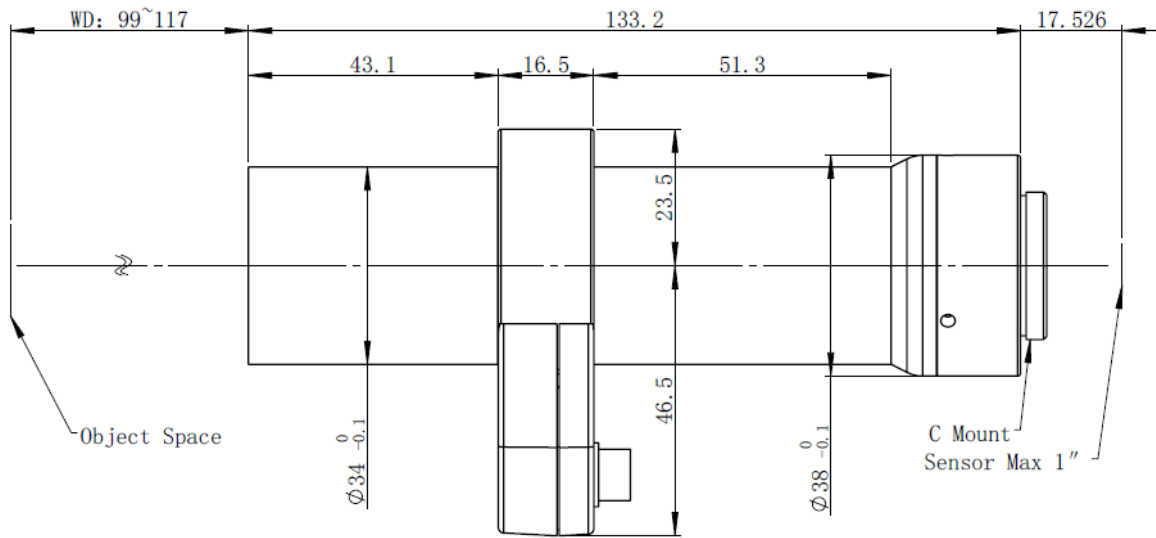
Mechanical drawing of the TLP-1-2.0-110 (unit: mm).
